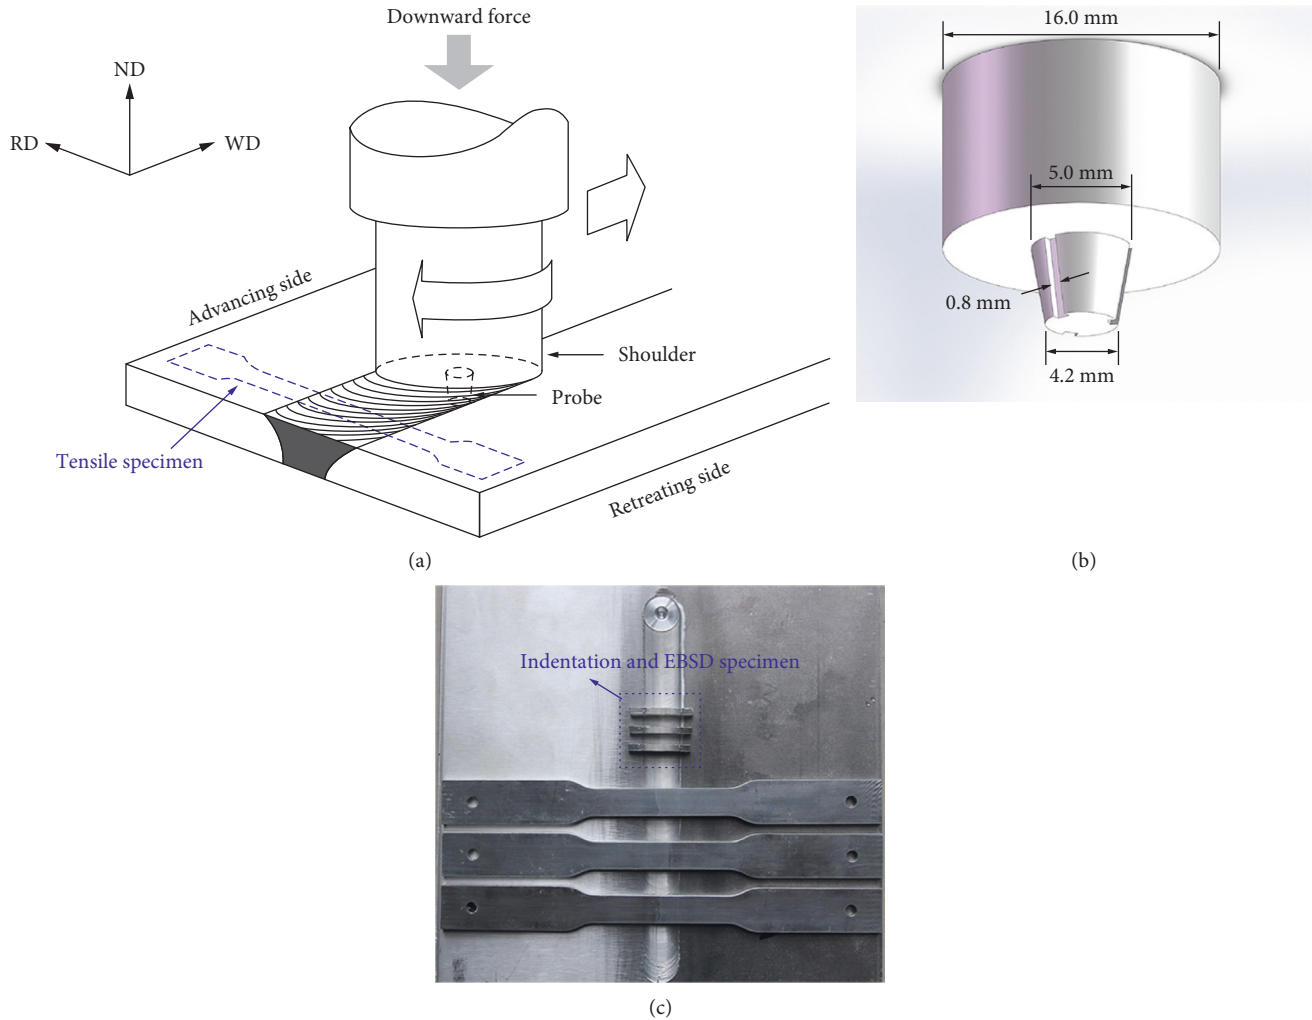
(a) Schematic drawing of the FSW joining process, (b) specific dimensions of the tool, and (c) the locations where tensile, indentation, and EBSD specimens were obtained.
